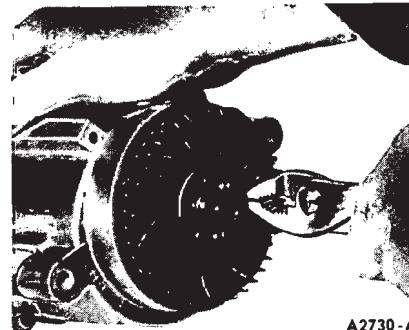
Removing Thermactor Air Pump Centrifugal Filter Fan
